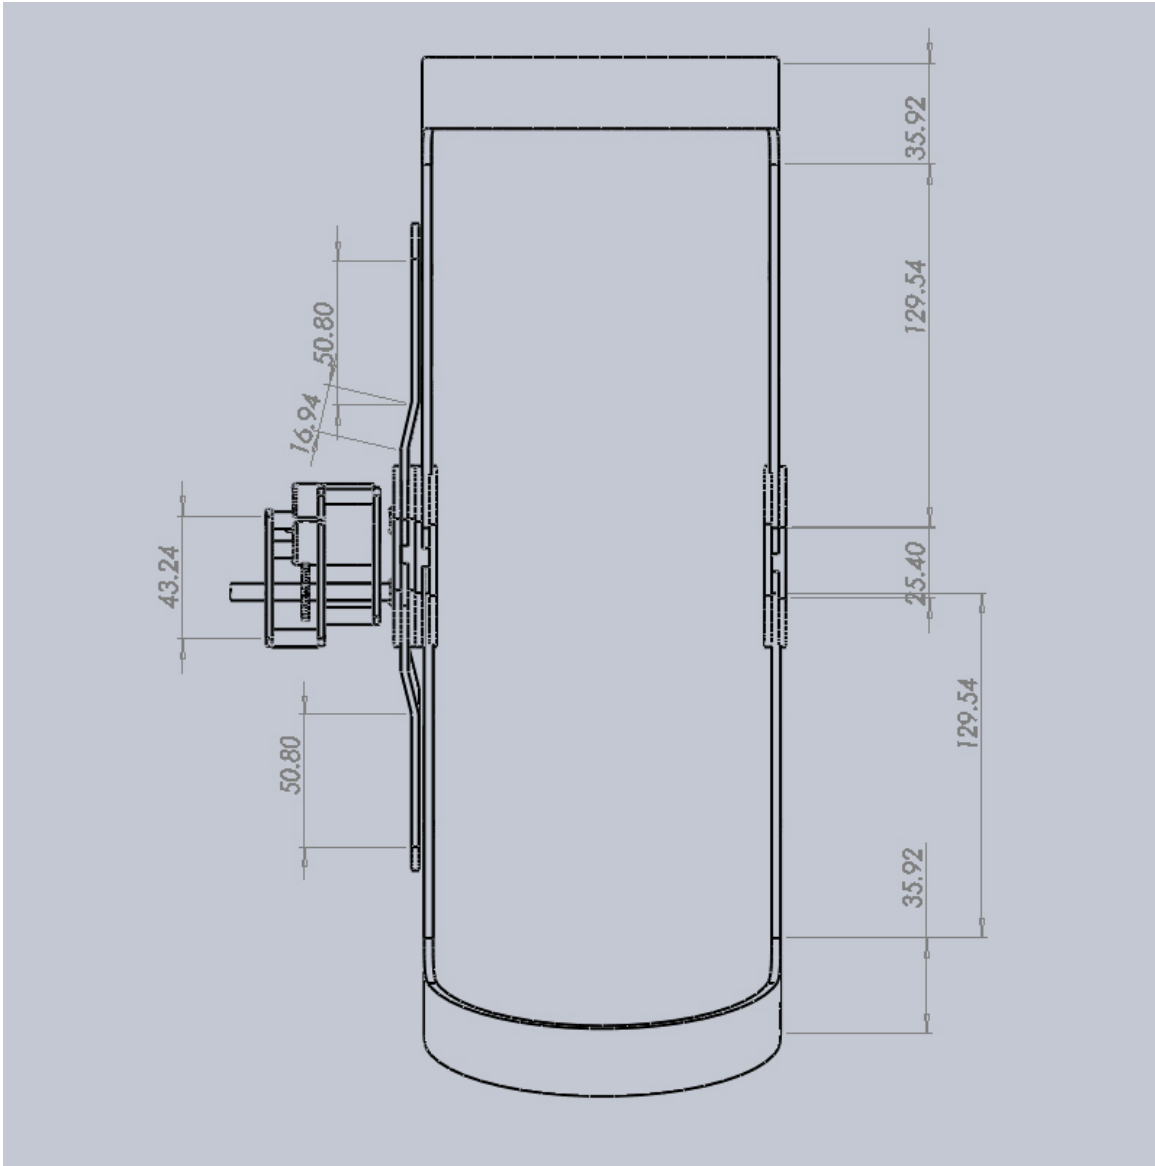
SolidWorks Solid Model Front View of the Knee Brace Assembly
